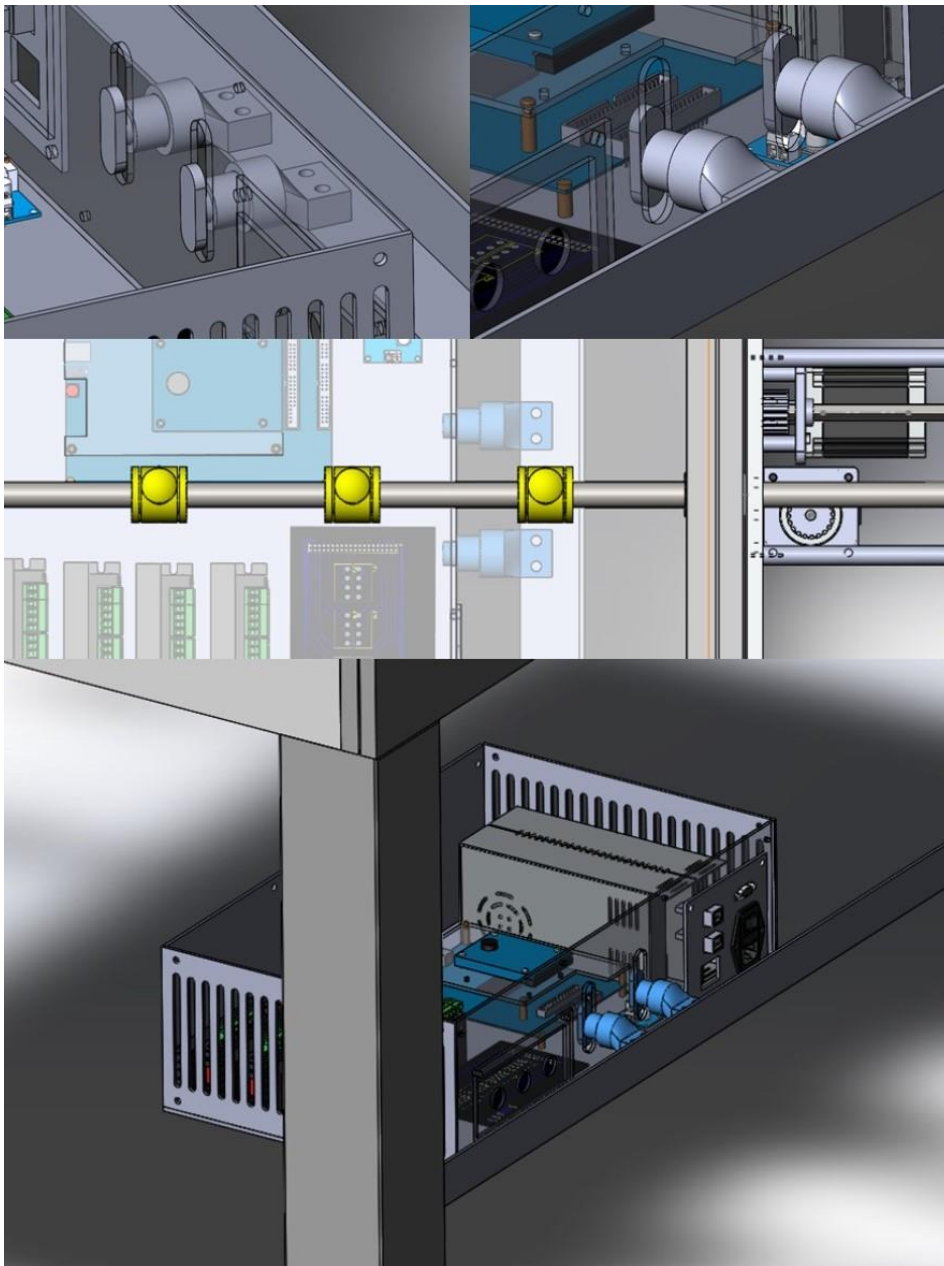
CAD model of the placement jig for the foosball table vision system
